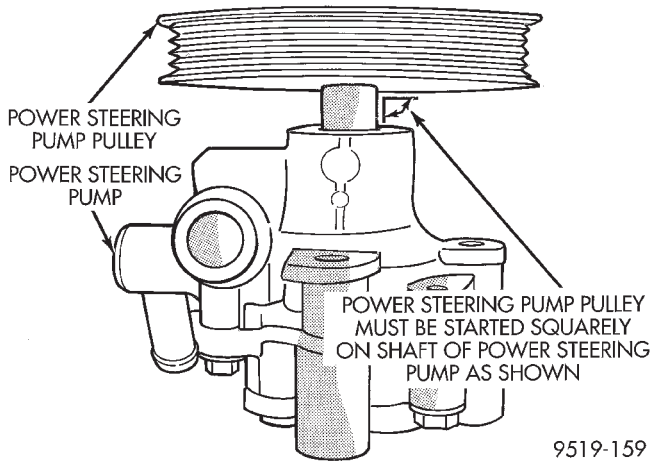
Pulley Positioned On Shaft Of Power Steering Pump
